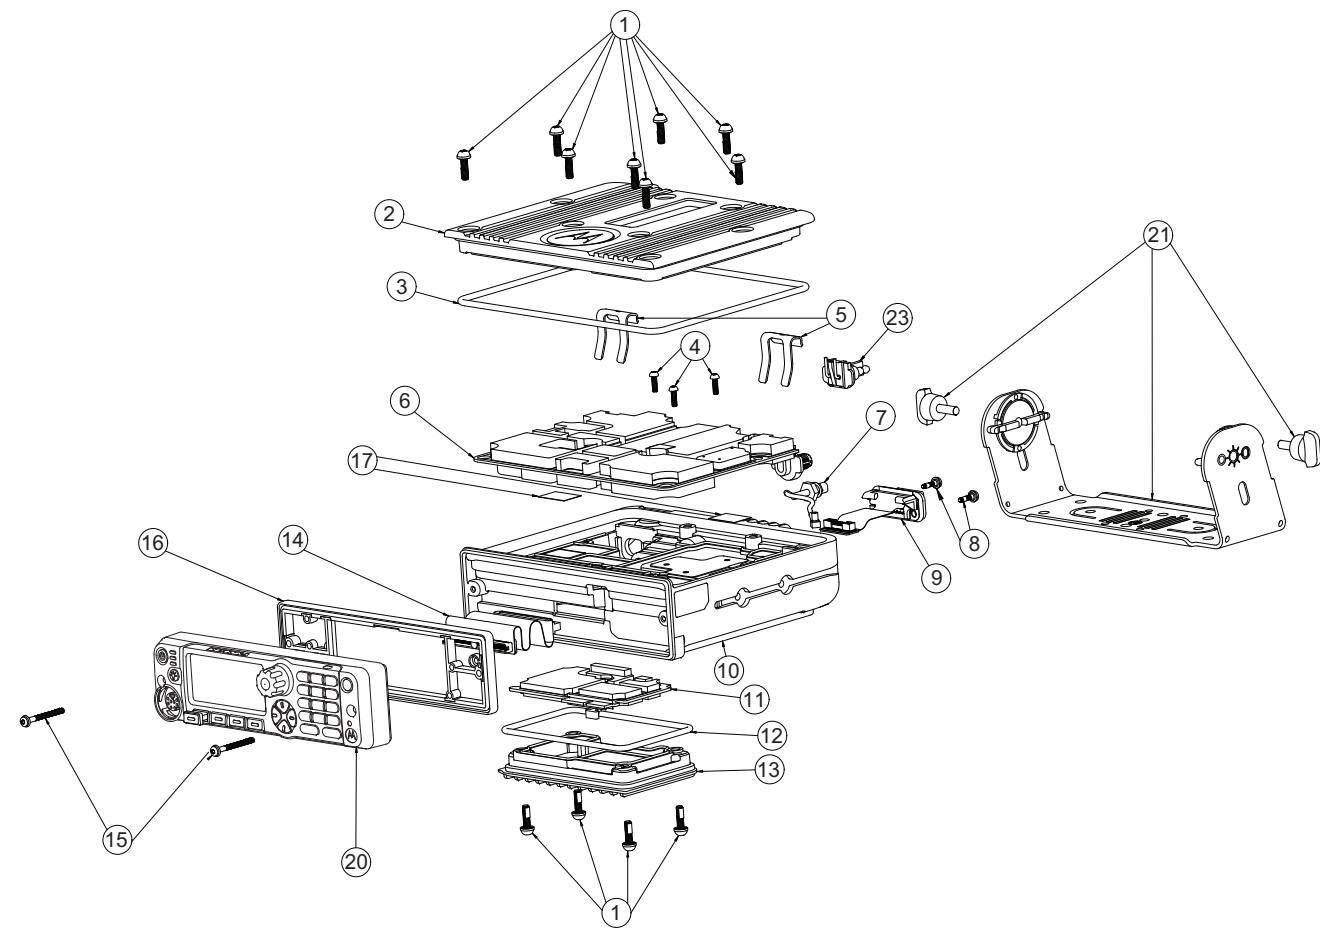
APX 2500 O7 Dash Mount Radio Exploded View
